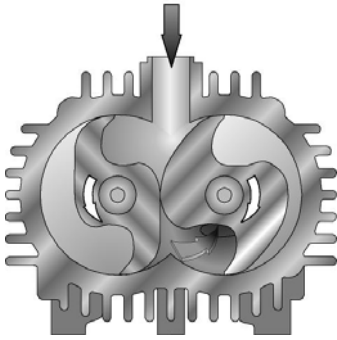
Section through a rotary lobe vacuum pump, Dr.-Ing. K. Busch GmbH
